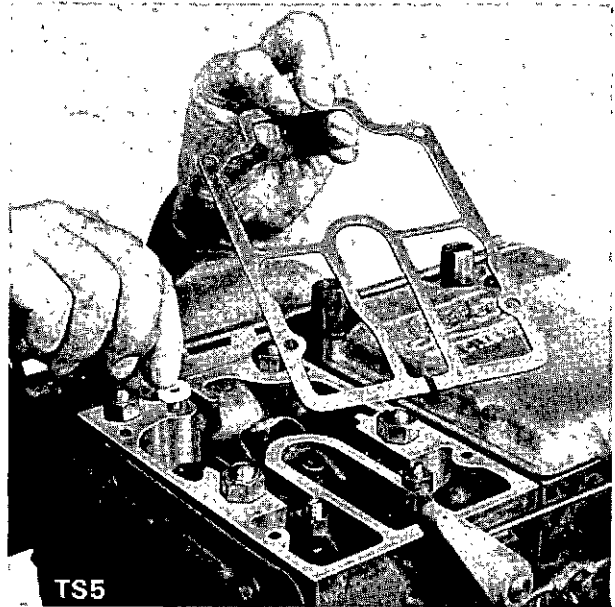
Cylinder Head Cover Joint and Felt Washer
